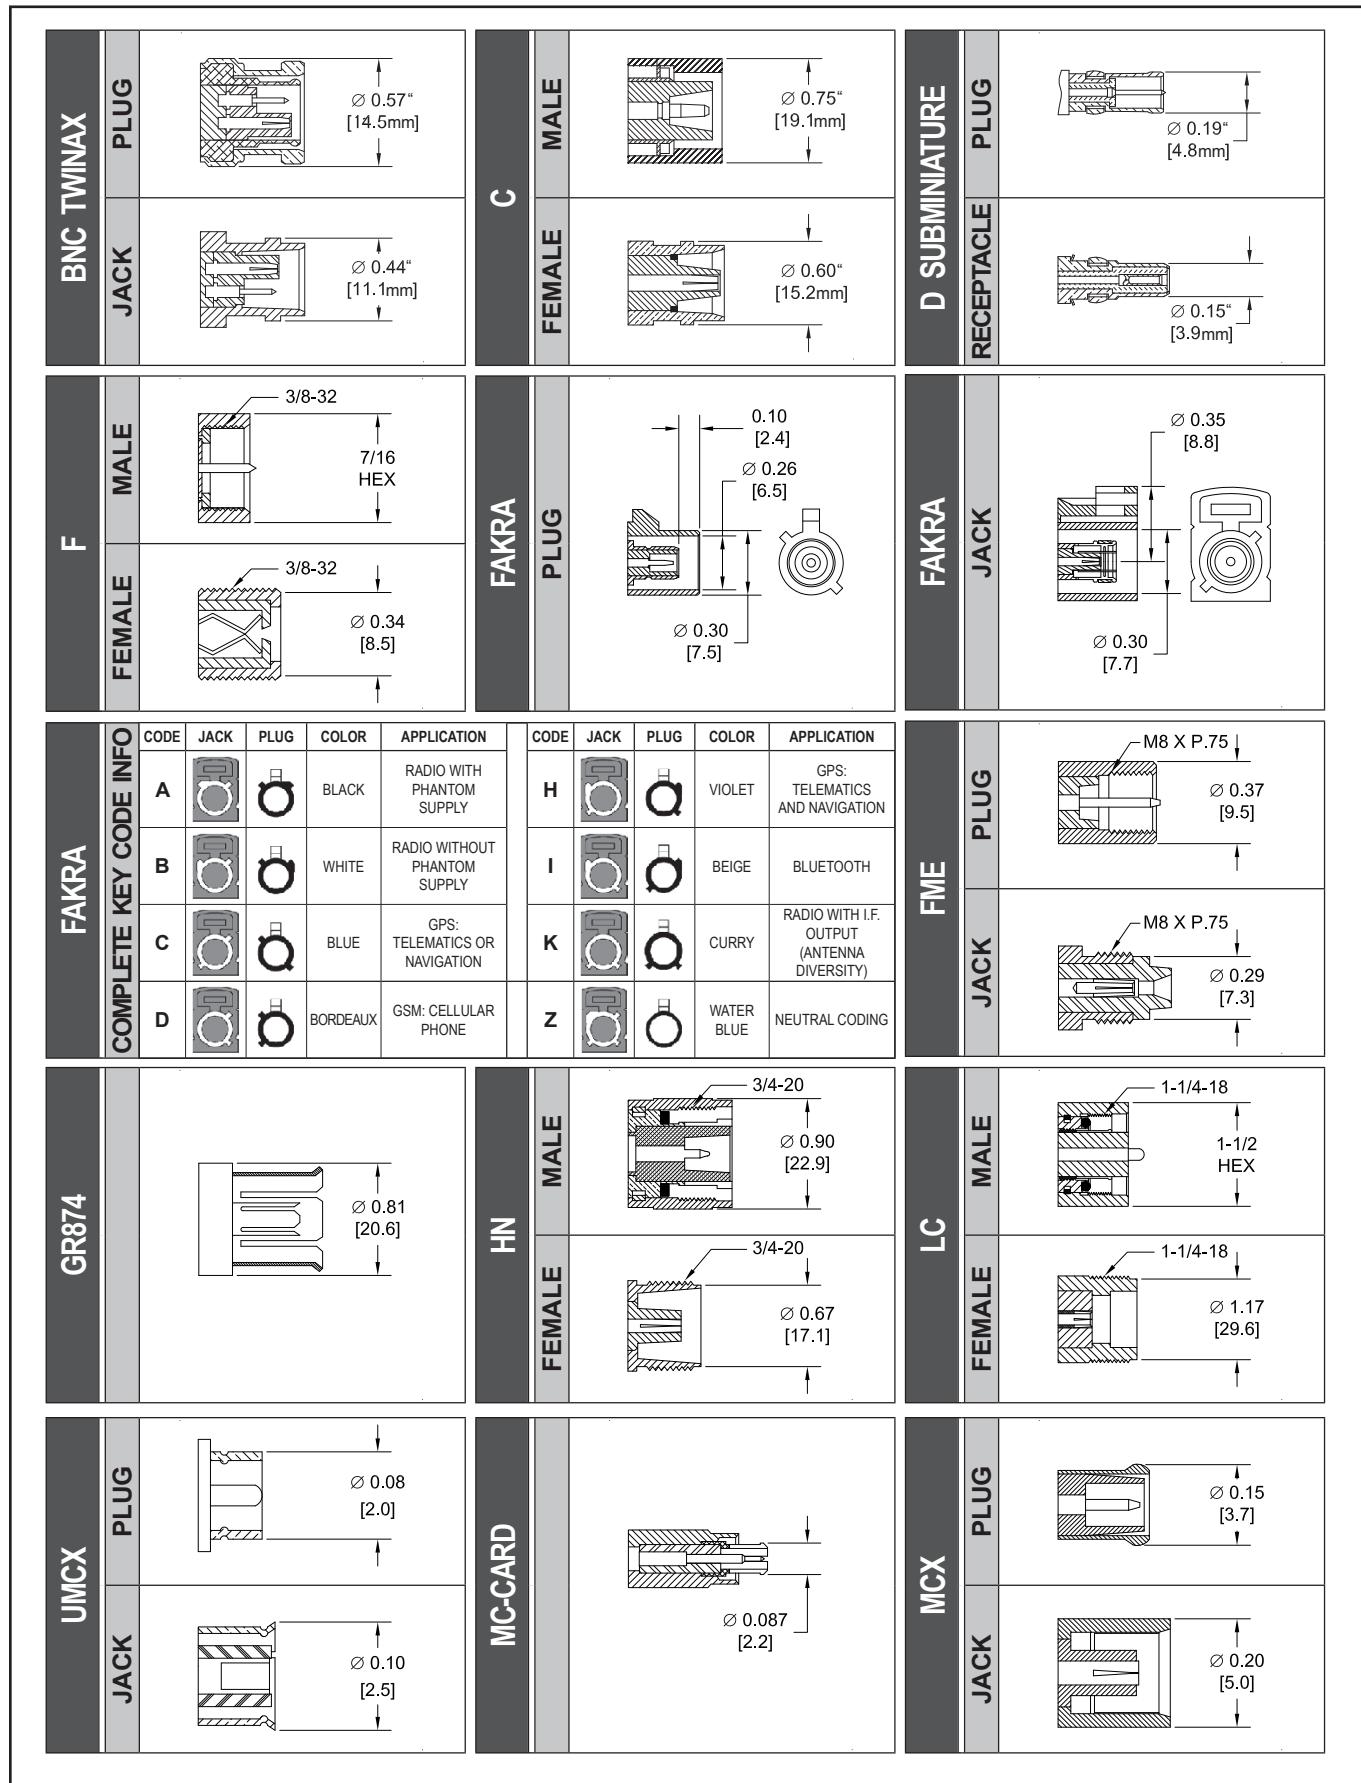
B – Connector side views, set 2 of 4. (Courtesy of Pasternak)
